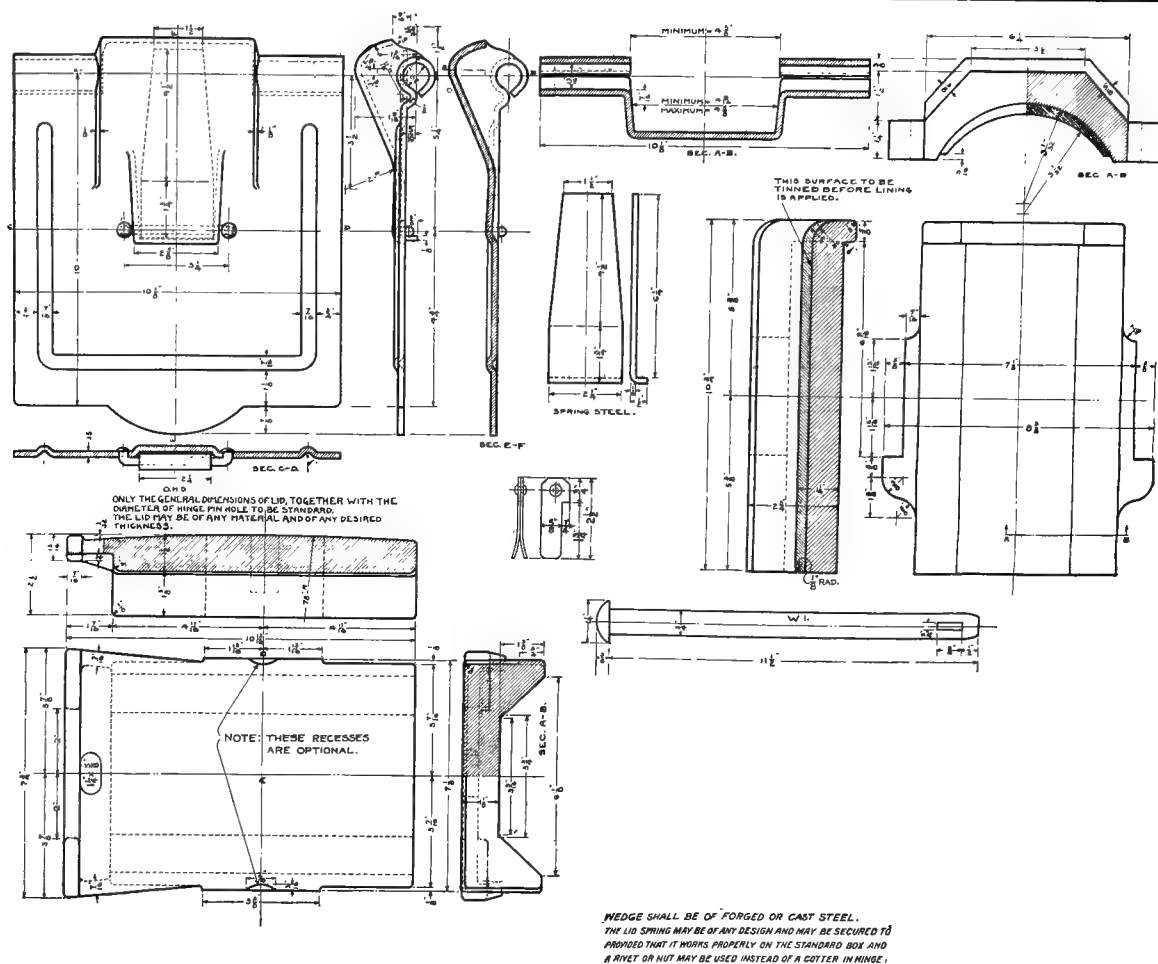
M. C. B. Standard Bearing, Wedge and Journal Box Lid for 6 in. by 11 in. Journal.
